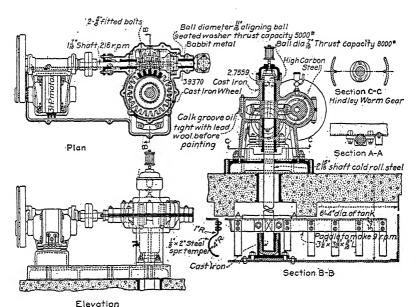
Details of stirrer for lime slaking designed for Jerome Park filter plant in New York City.
